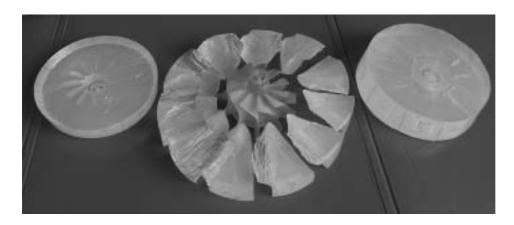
Appearance of silicon mold matrix used for casting of models made of composites tested
